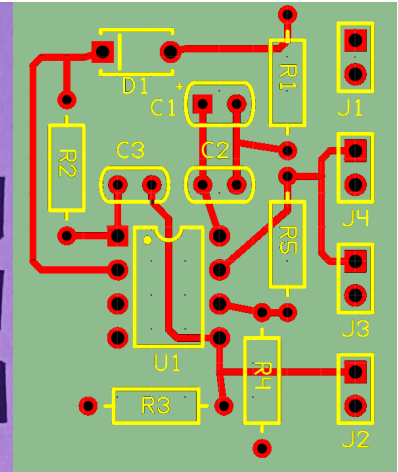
Top of PCB. The black circles are where there are holes for mounting the components.
